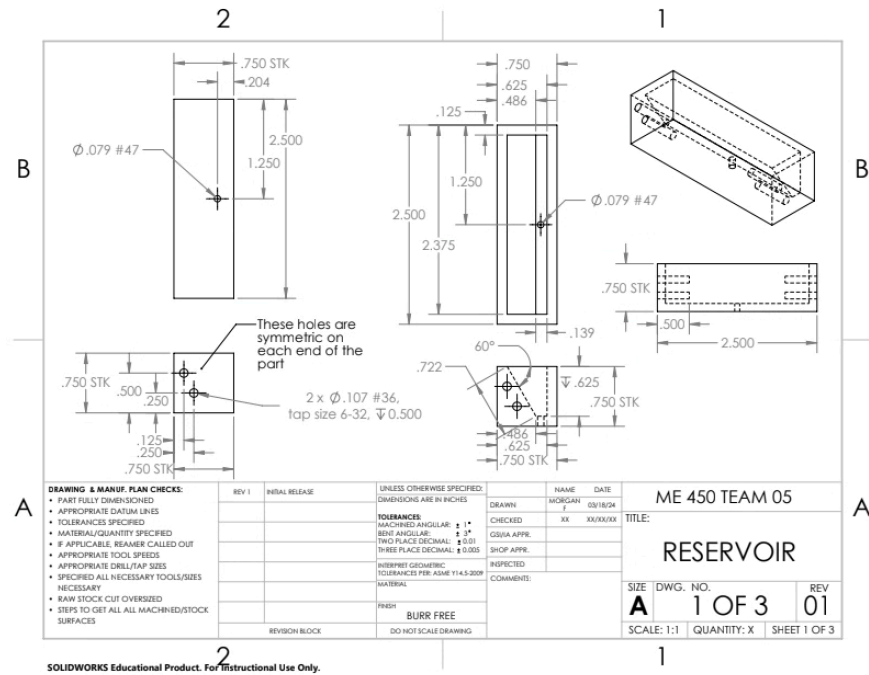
Engineering Drawing of Reservoir with Manufacturing plan
